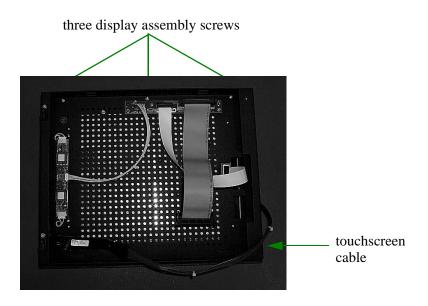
Philips (12" Unit) Display Assembly Cable Locations
